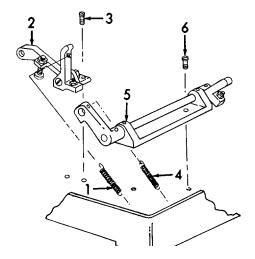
Foot Treadle Lever Assemblies, Removal.
